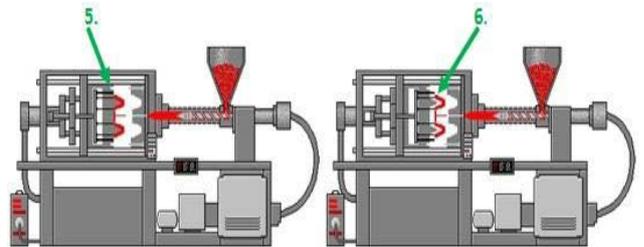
Scheme of the open mould and extrusion of the moulded plastics part [5]
